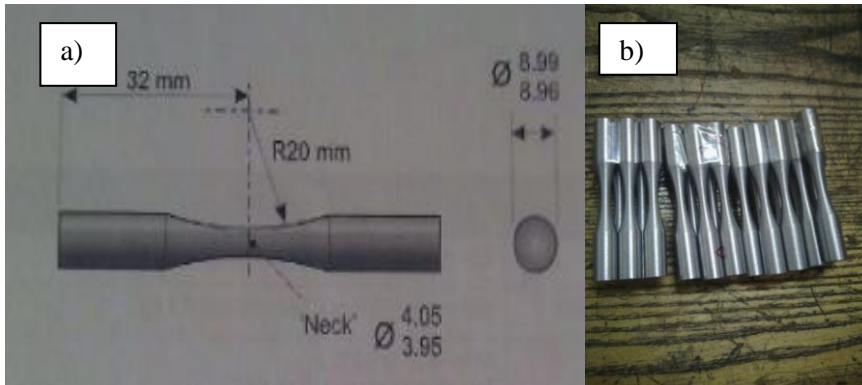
a) Standard fatigue specimen dimensions b) Fatigue specimens machined from cast bar
